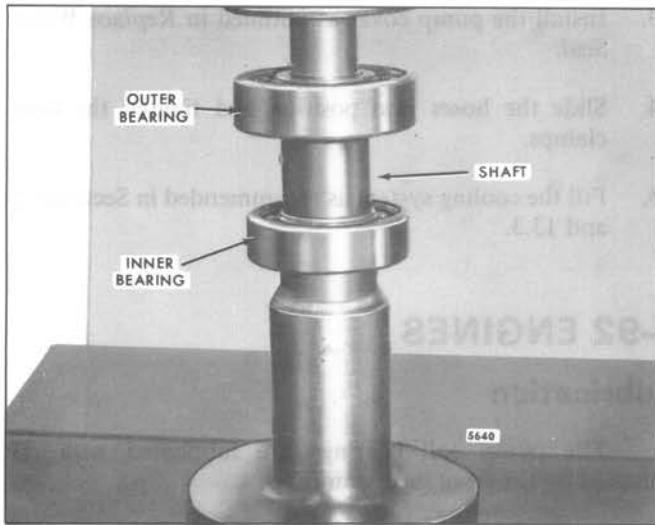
Pressing Bearing on Pump Shaft using Tool J 25257
